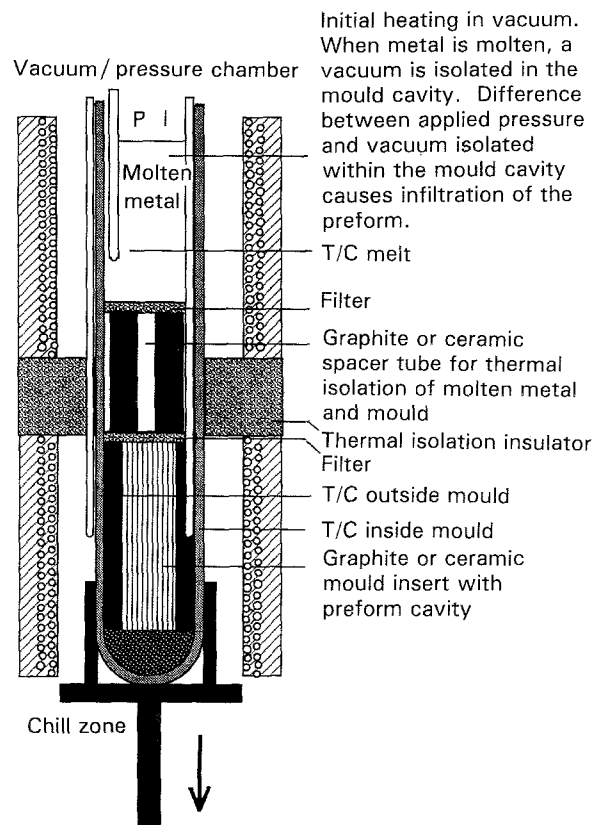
Mould set-up for top-fill infiltration casting process (patent pending to the PCAST corporation).
